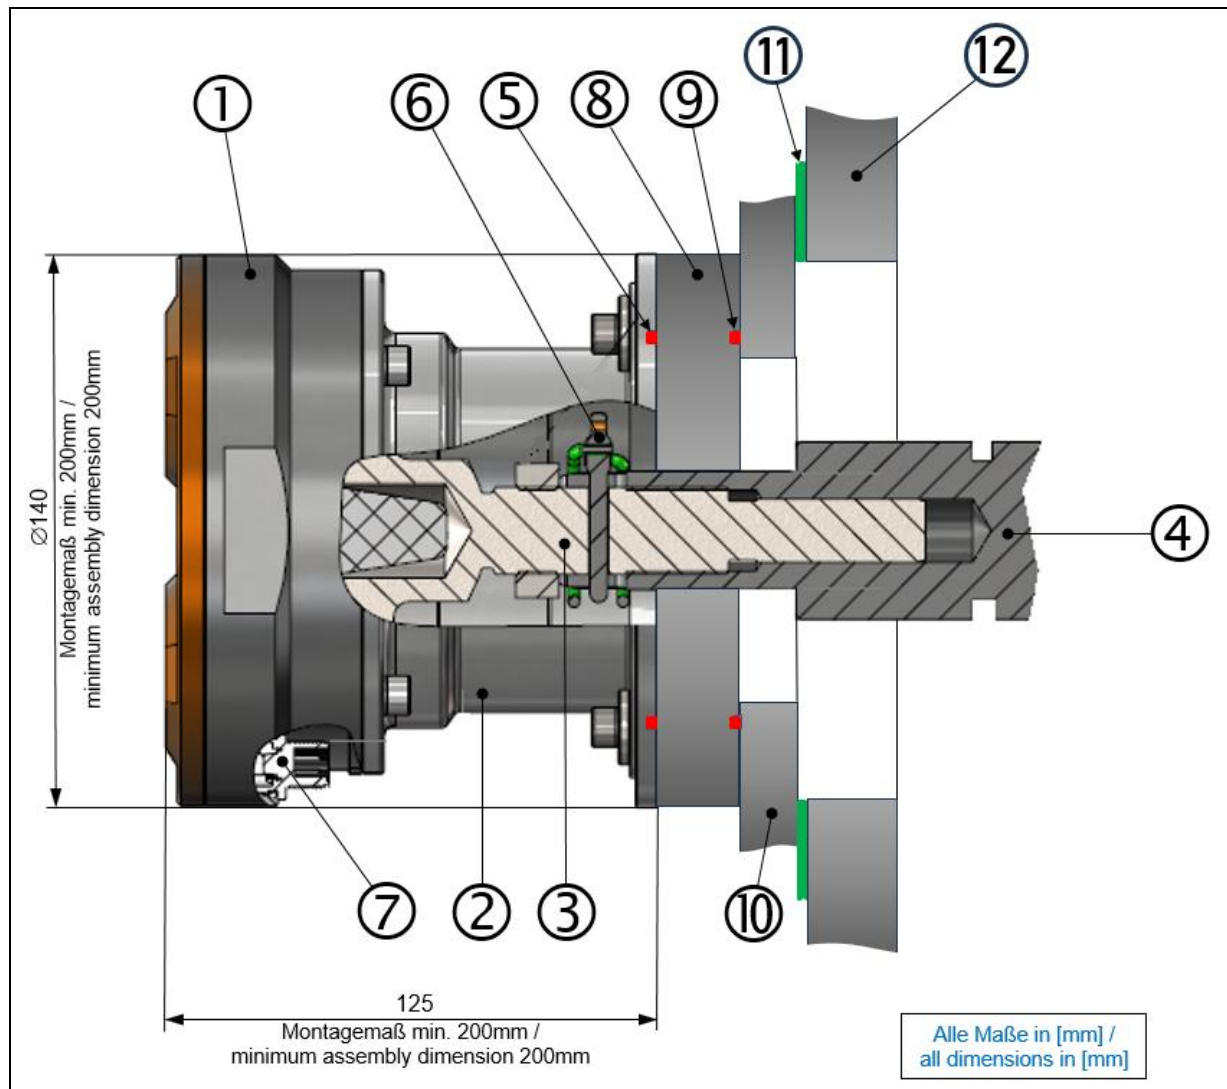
Complete overview of components, BEAROMOS® 2020
